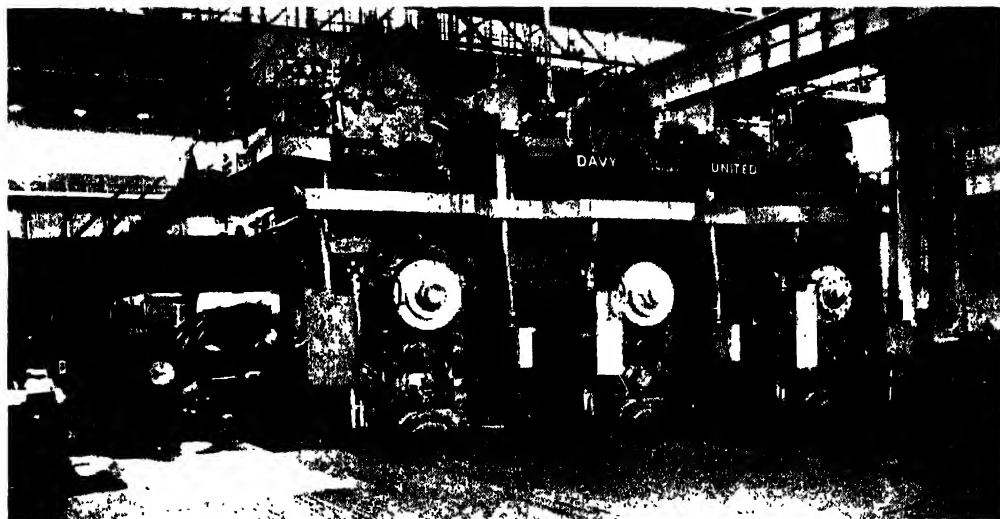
COLD STRIP MILL FOR STEEL. Cold working is a method of reducing material to exact dimensions. This mill can roll strip up to 74 inches wide at speeds of up to 2,035 feet per minute. Housings on the mill each weigh 100 tons.
